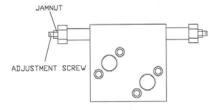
Brake Valve Adjustment Screw and Jam Nut
